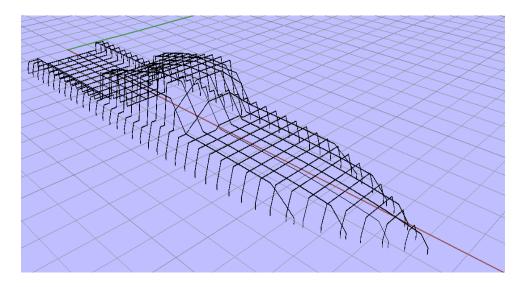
, longitudinal and transverse section frames lines with inside offset 14 mm
